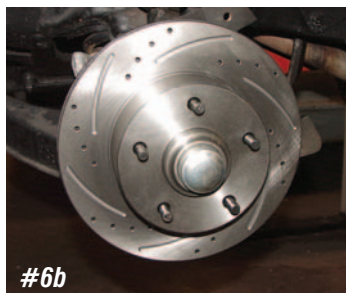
& 6b: There is a left and right rotor per the direction of the drilled holes and slots. P/N 20-200 is the left hand rotor. Install the rotor, outer bearing, spindle nut washer, spindle nut and torque the spindle nut to 33 ft/lbs. Next back off the spindle nut no more the 1/8 turn to align one of the slots in the spindle nut with one of the holes in the spindle for the cotter pin.
